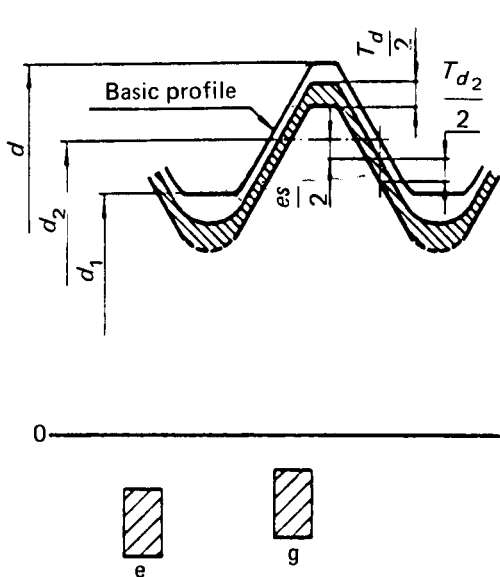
Bolt threads with tolerance positions e and g
